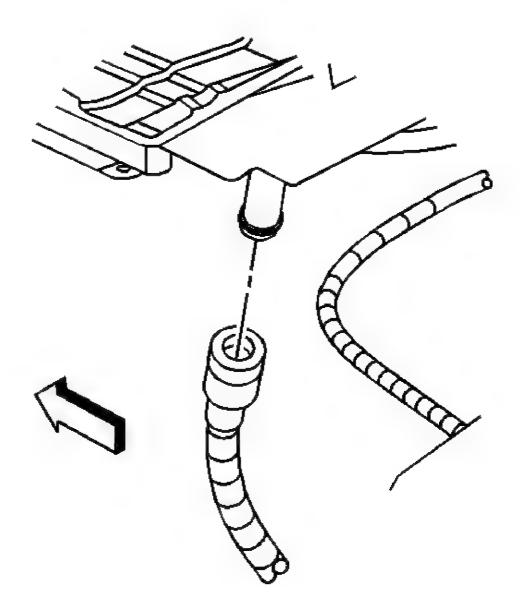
Identifying Drain Hose At Drain Spout On Rear Of Sunroof Module Courtesy of GENERAL MOTORS CORP.
